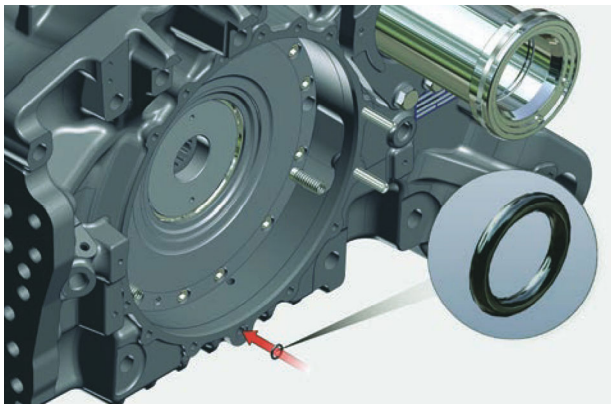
Assemble the lubrication circuit o-rings in the central housing.
